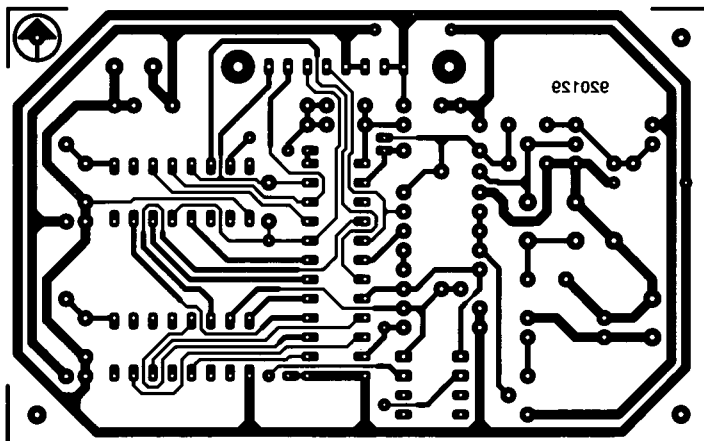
Track layout (mirror image) and component mounting plan of the printed circuit board designed for the test pattern generator.
